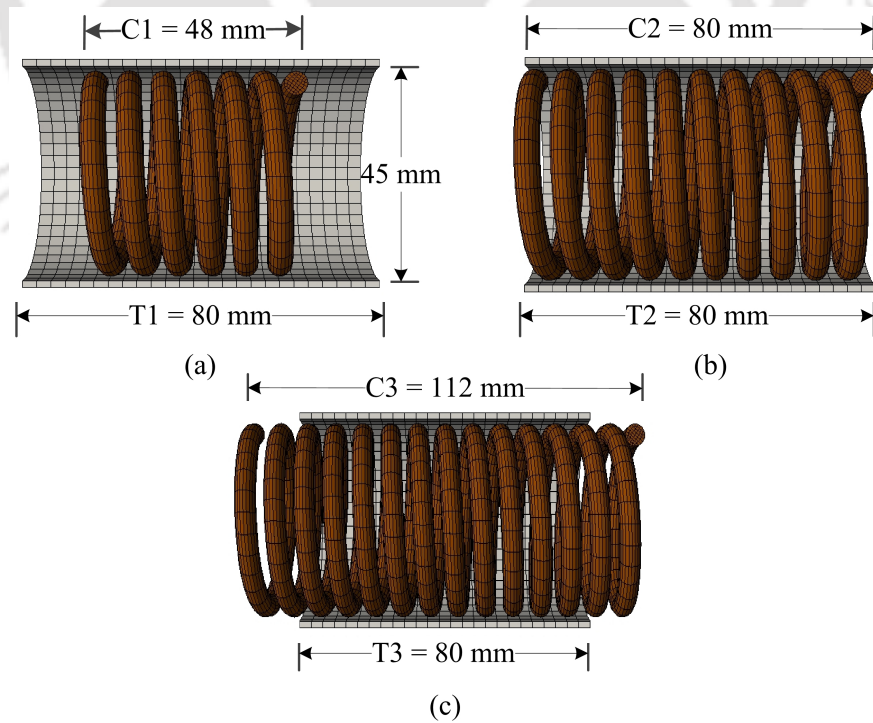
Coil-tube arrangement for coil (a) C1 (b) C2 (c) C3
